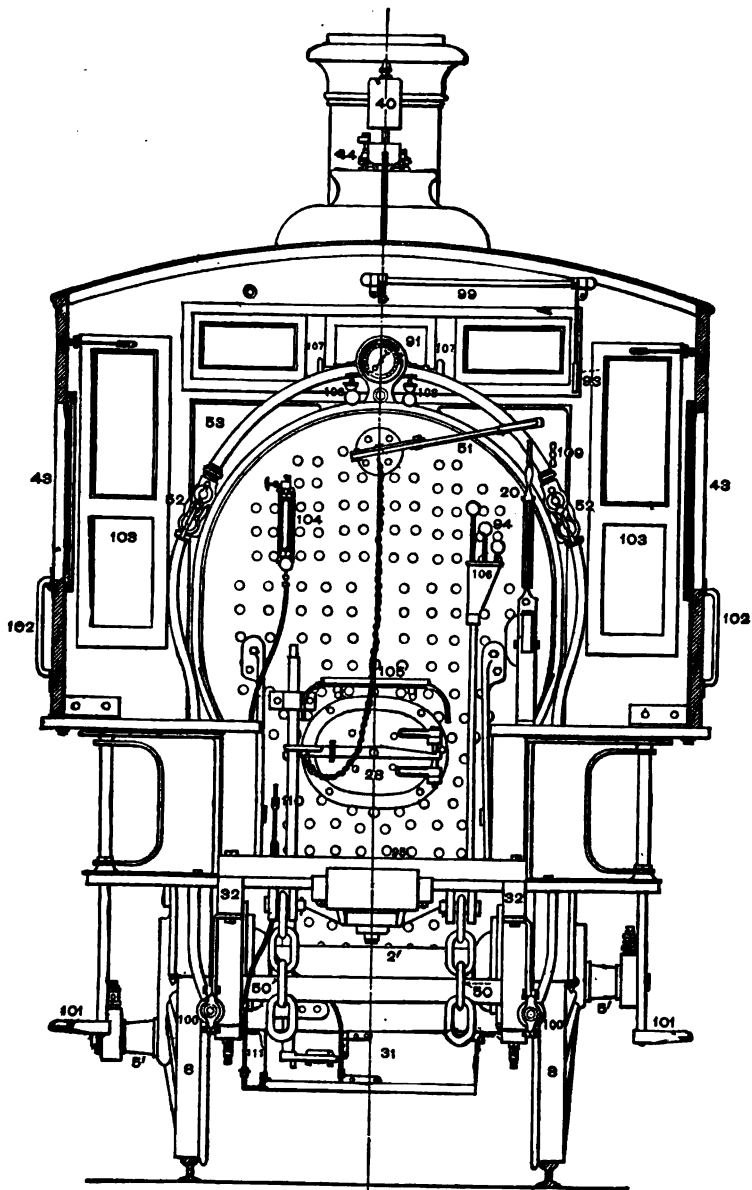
Back End View of Locomotive. Scale  $\frac{3}{4}$  in. = 1 ft
